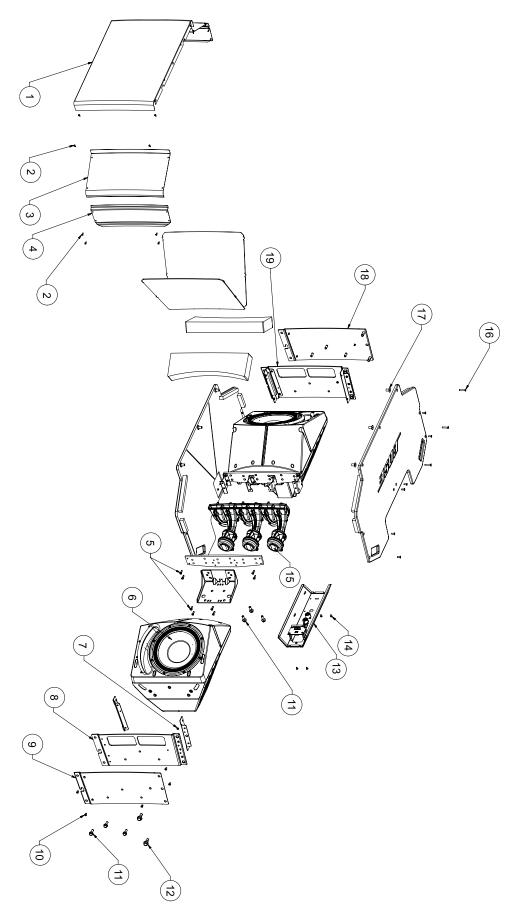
RoomMatch® Array Module Loudspeakers Exploded View
